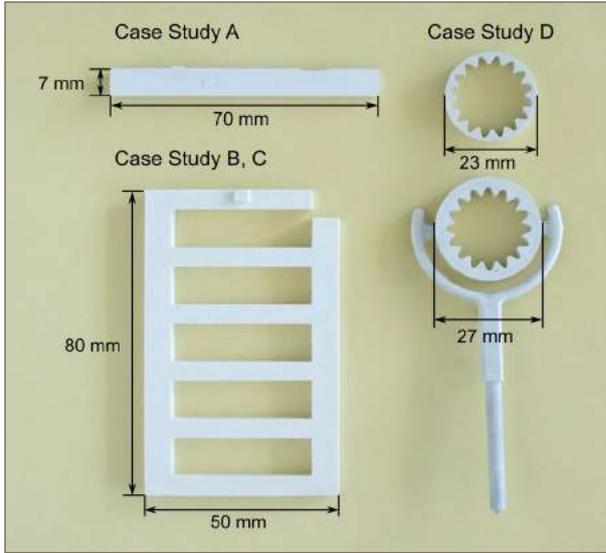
Test parts used for the case studies: A: bar; B, C: modified ladder; D: two-component gear wheel
